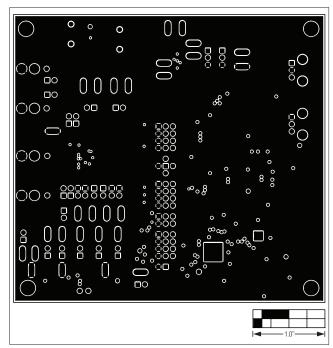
MAX9880A EV Kit PCB Layout—Layer 5
